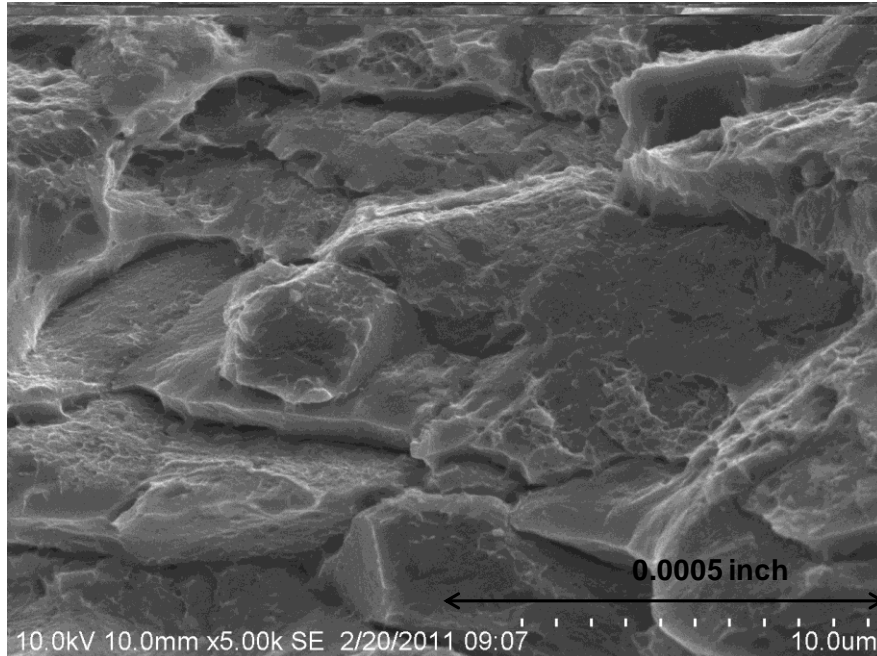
Fracture Surface from Specimen L5MCR-04-325 (lot 620853) that was Aged at 325°F for 24 hours
